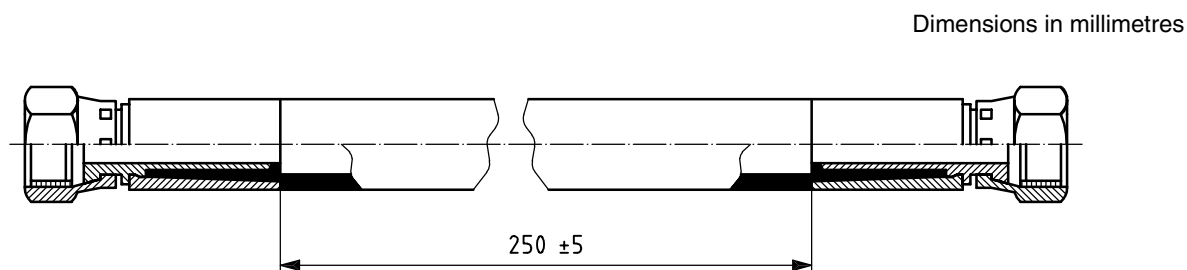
Internal free length, with tolerance, of test piece
